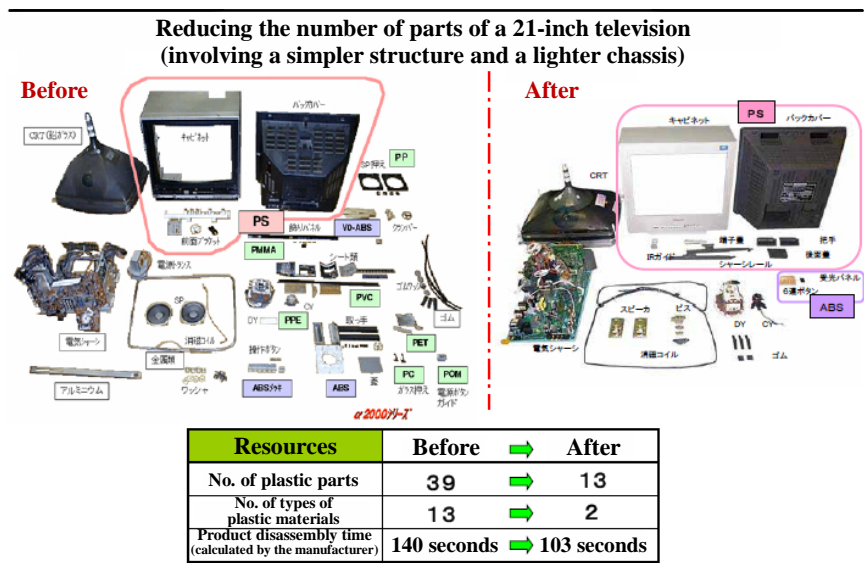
An example of successfully reducing the product disassembly time with fewer parts and types of plastic materials
